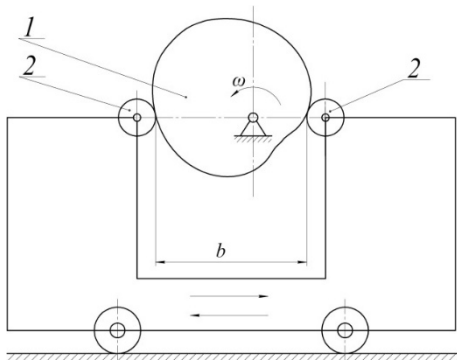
Scheme of cam mechanism driven reciprocating trolley.
